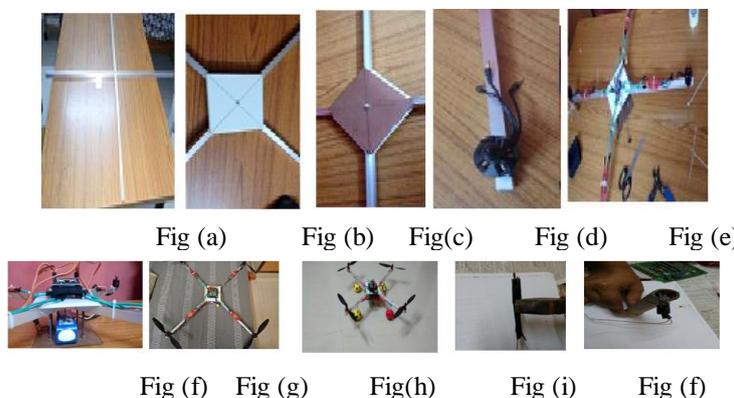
(a) Quad frame (b) K board mount (c) Battery mount (d) Fixing motors (e) Installation of ESC's (f) Mounting of KK Board and Battery (g) Fixation of Propellers (h) Assembled Quadcopter (i) Construction of Ignition System (j) Smoke Cartridge
